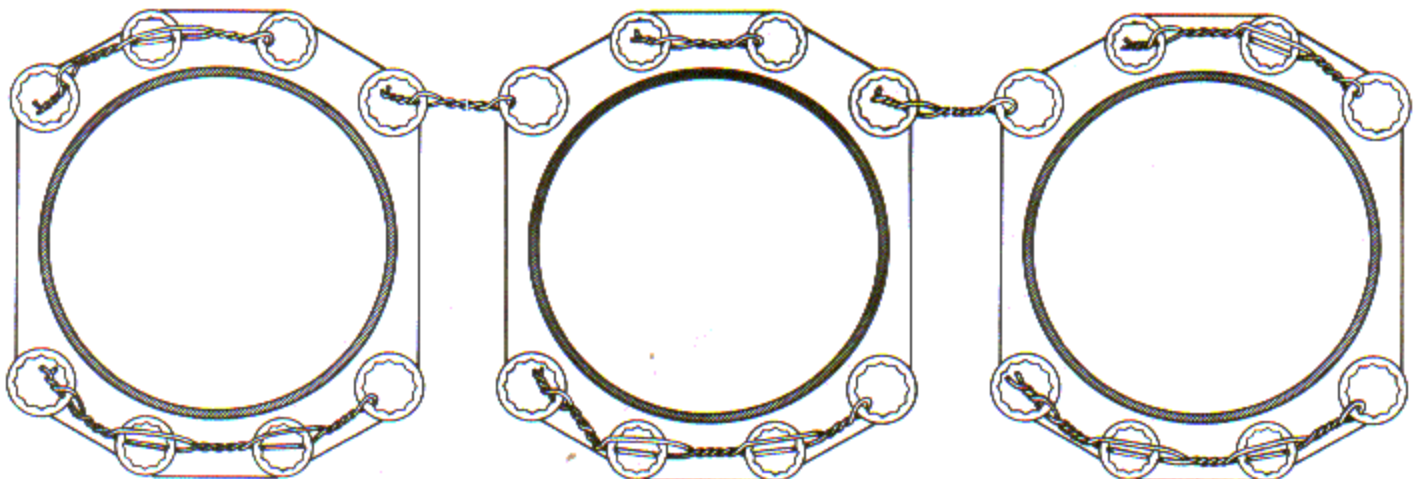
Proper Method of Lockwiring Cylinder Base Nuts
